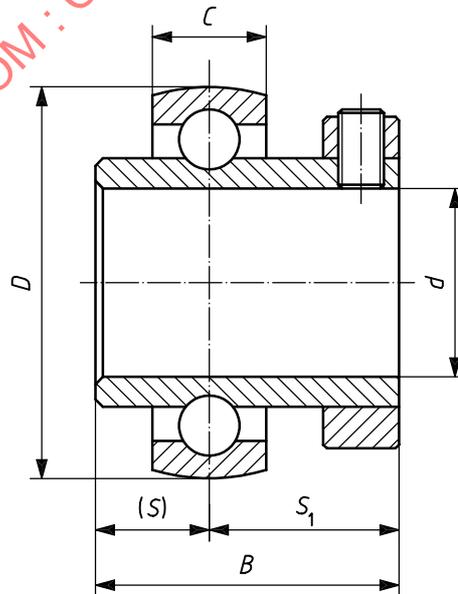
Bearing with concentric locking collar around the inner ring — Intermediate overall width
